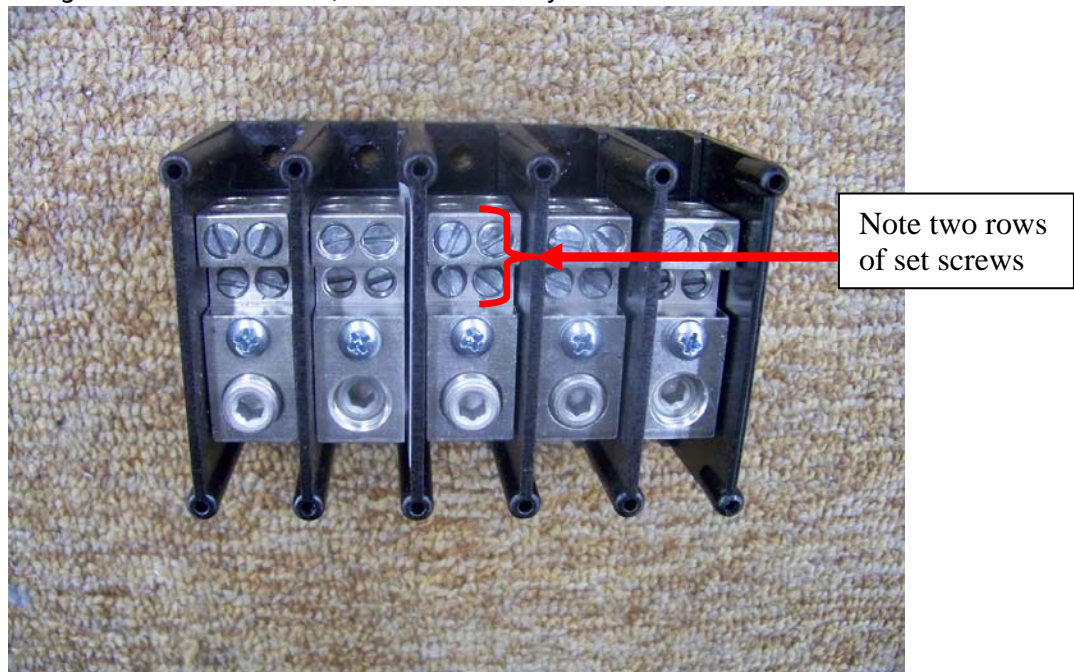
TB2 detail, DO NOT REMOVE TB2 (shown out of chassis for clarity).
